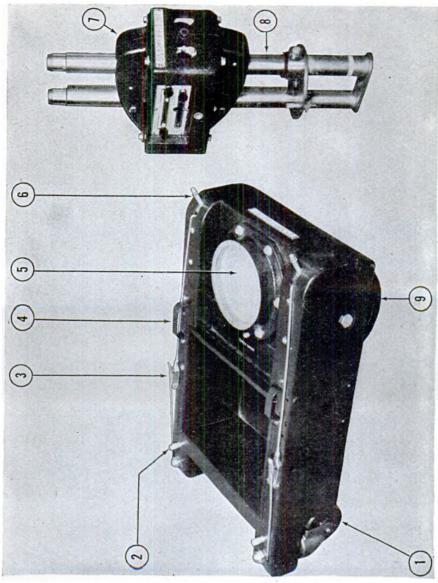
Chassis, lower mast section, and cross-arm carriage, part of Chest MD X-1, old type.
